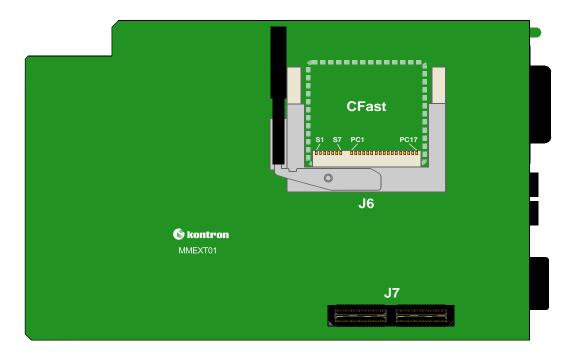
CP3002-HDD Module Layout (Bottom View)
